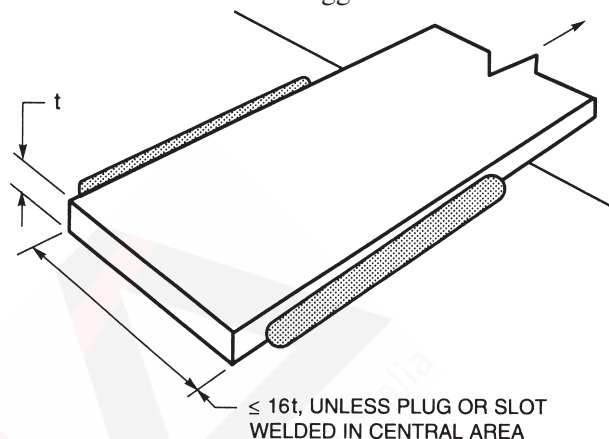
Fillet Welds on Opposite Sides of a Common Plane of Contact
